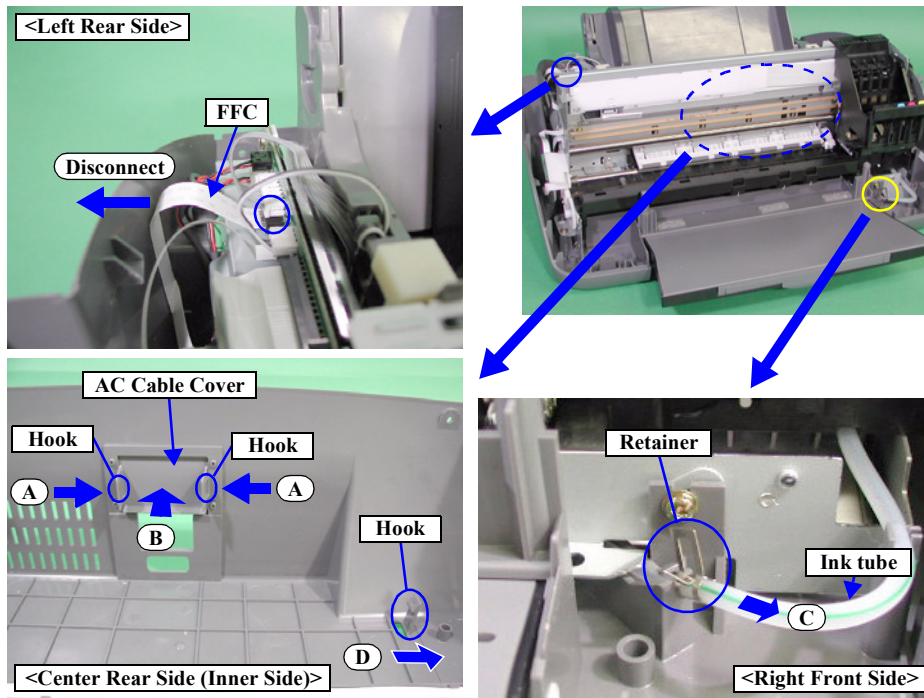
Lower Housing/Printer Mechanism Removal 2
